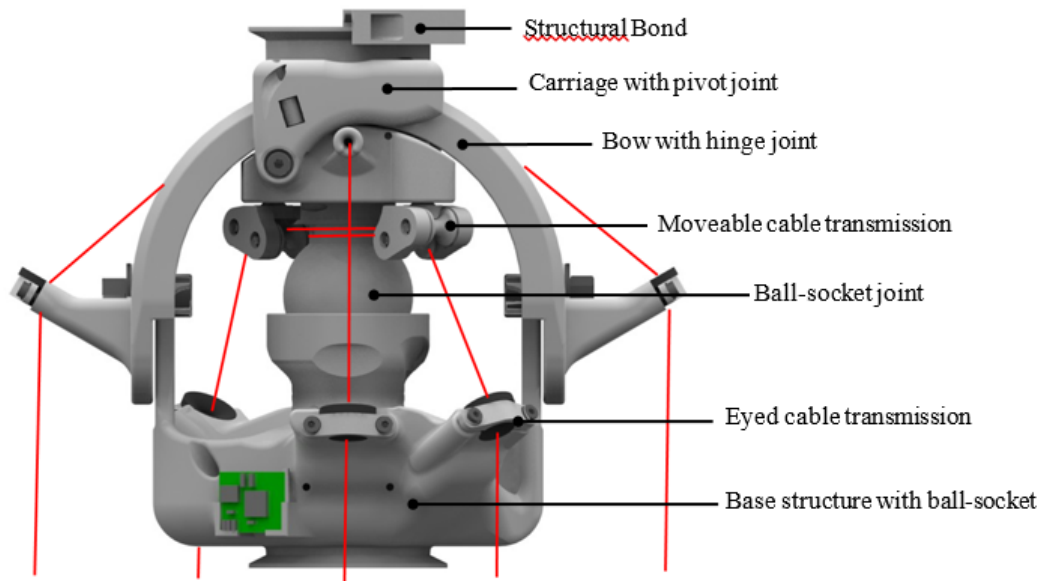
Cable transmission and assembly of the ball-and-socket joint
